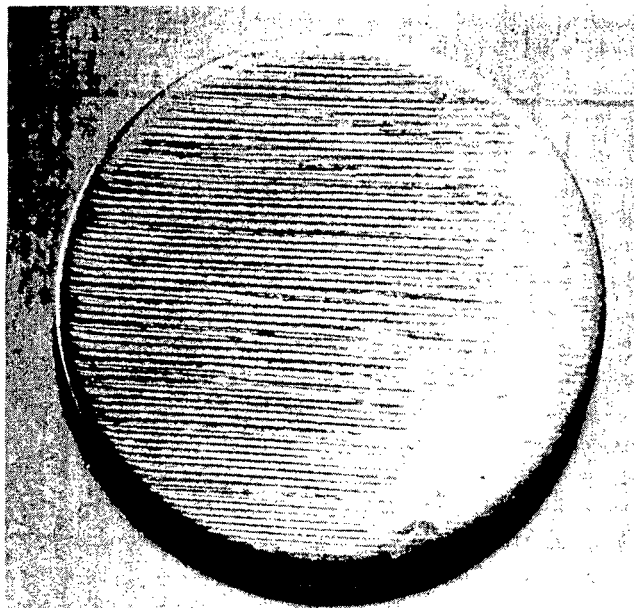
Model 5 (rough machine) before testing. L-57-2194
